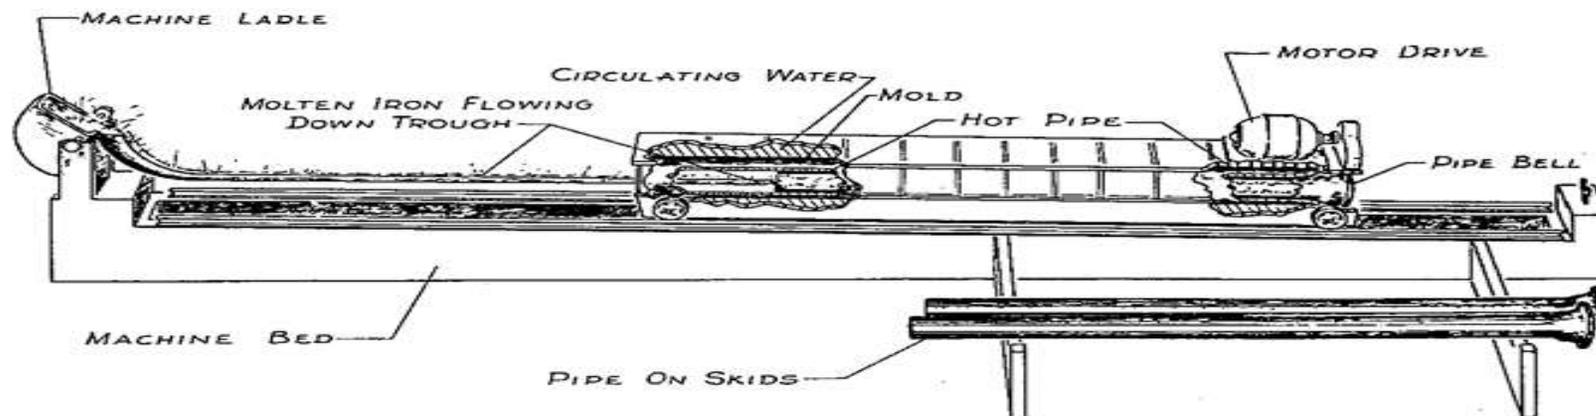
Casting machine for pipe centrifugally cast in metal molds.
